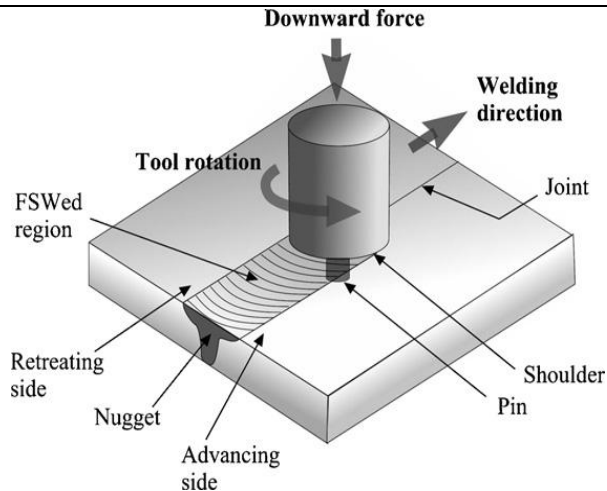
Schematic diagram of the Friction Stir Welding process [1]
